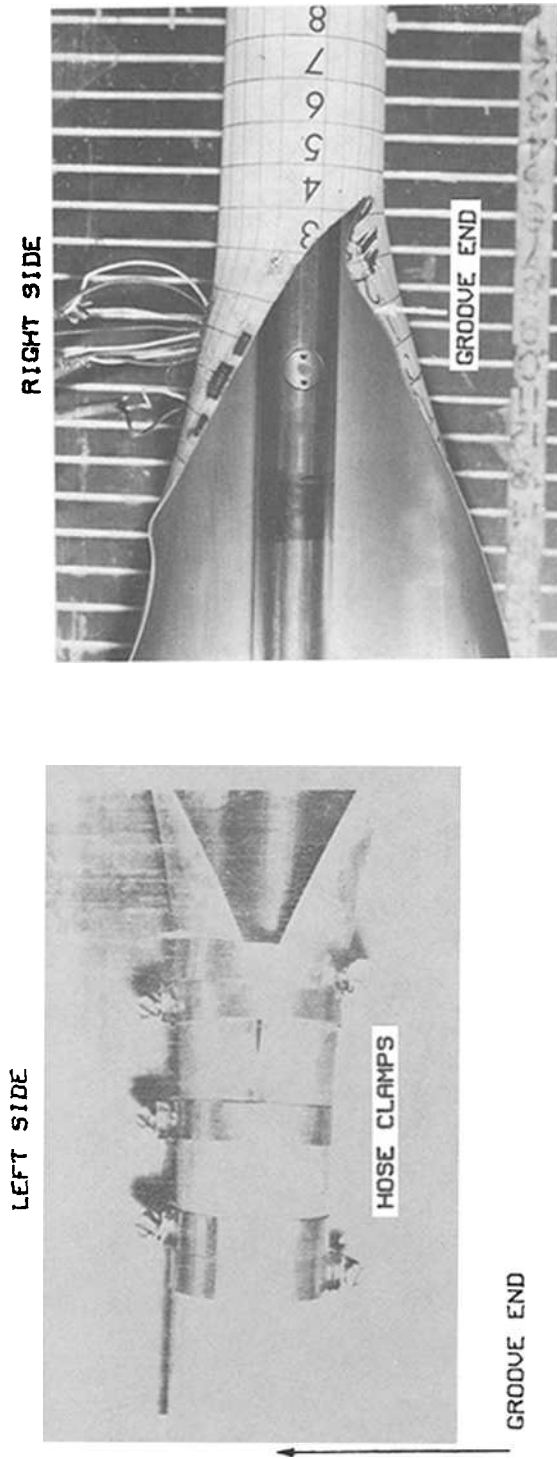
Hose clamps as crack arrester on the left side. Test No. L38; groove depth 0.23 mm and pressure 7850 kPa.
